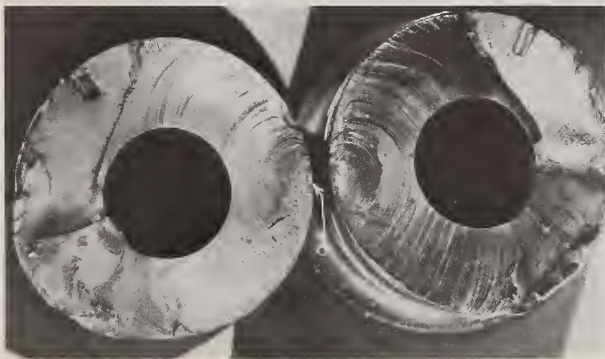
Fatigue fracture of a 2 in diameter aircraft axle showing pronounced "clam shell" markings.
